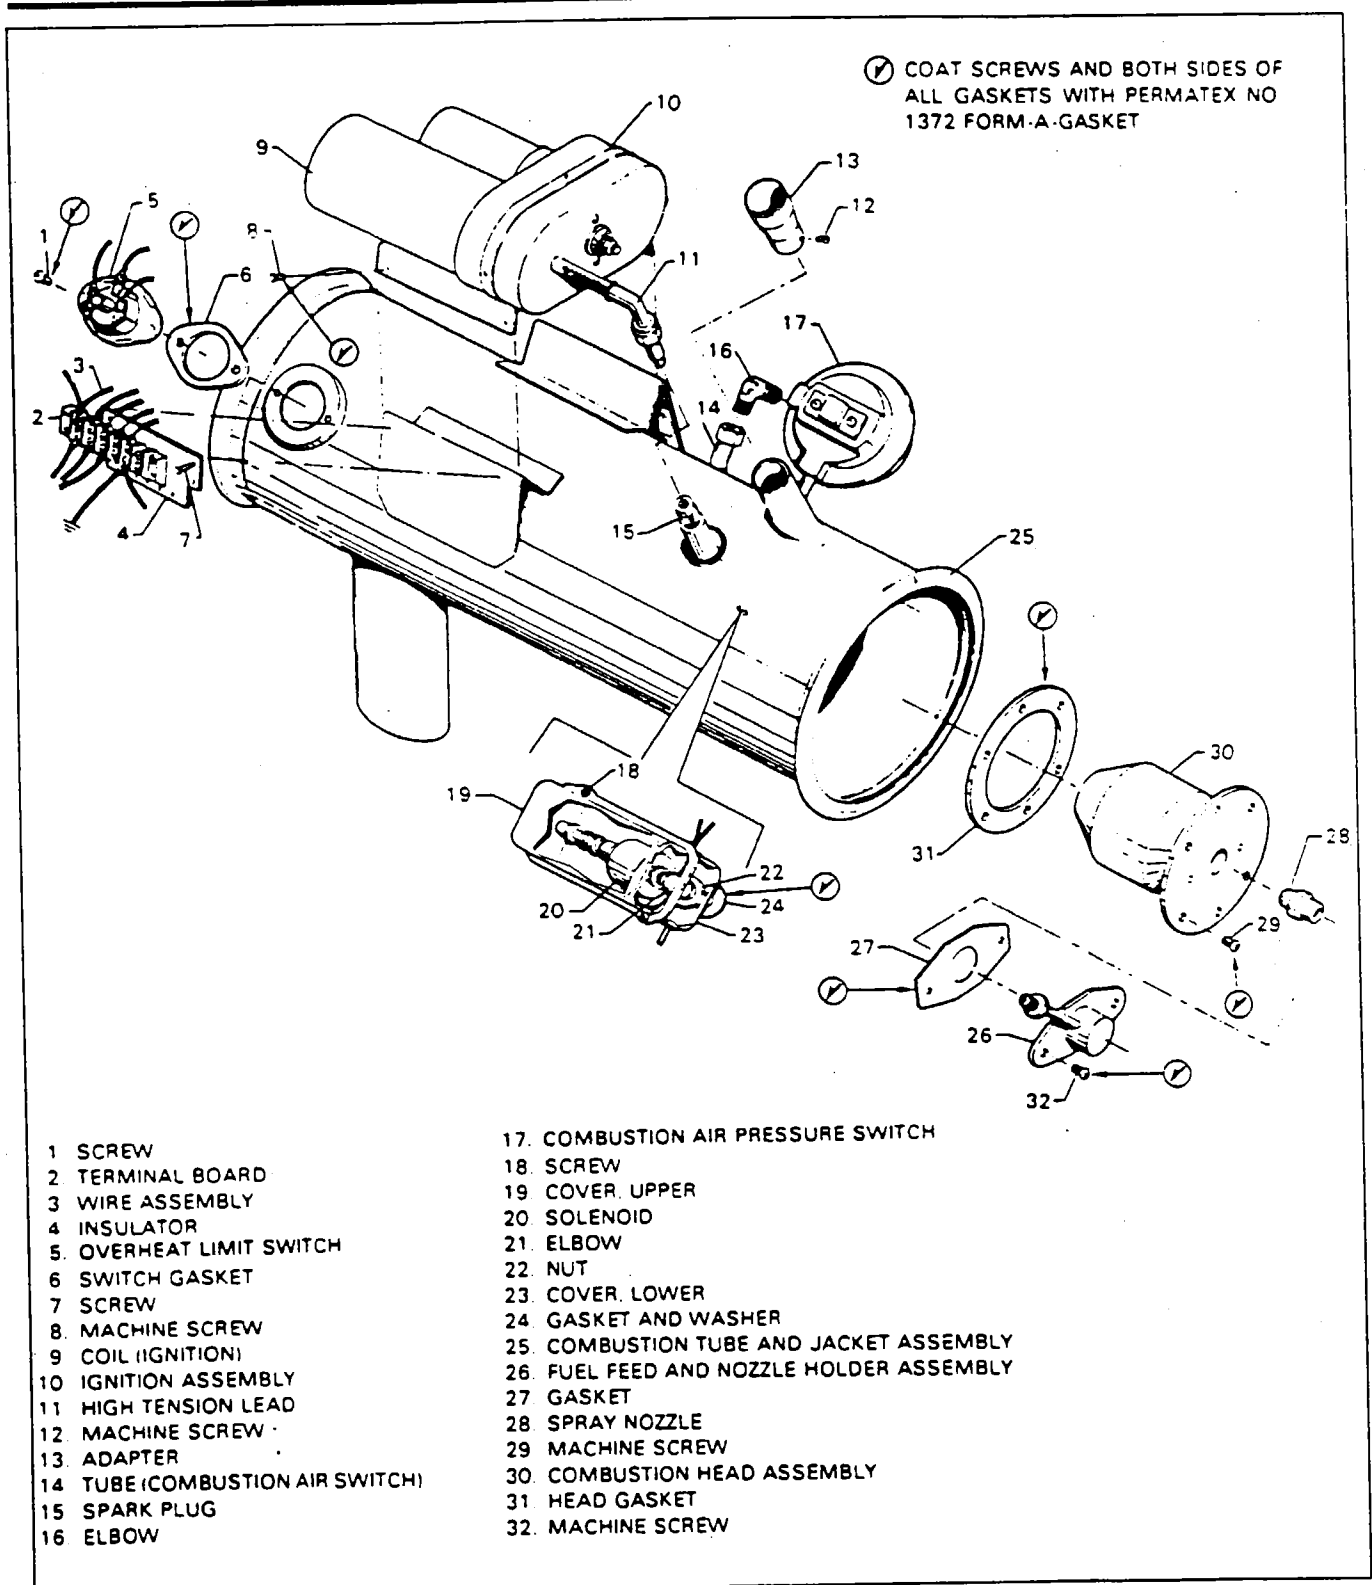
Heater Assembly (47D65-3) Exploded View
